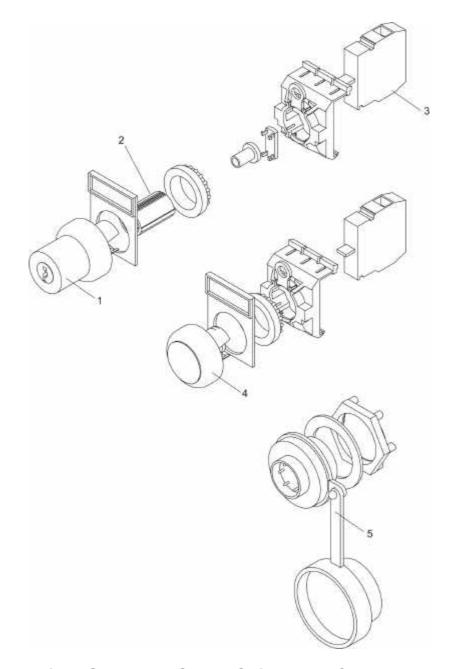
Printer Socket and Slector Switch and RCU Reset Assembly
